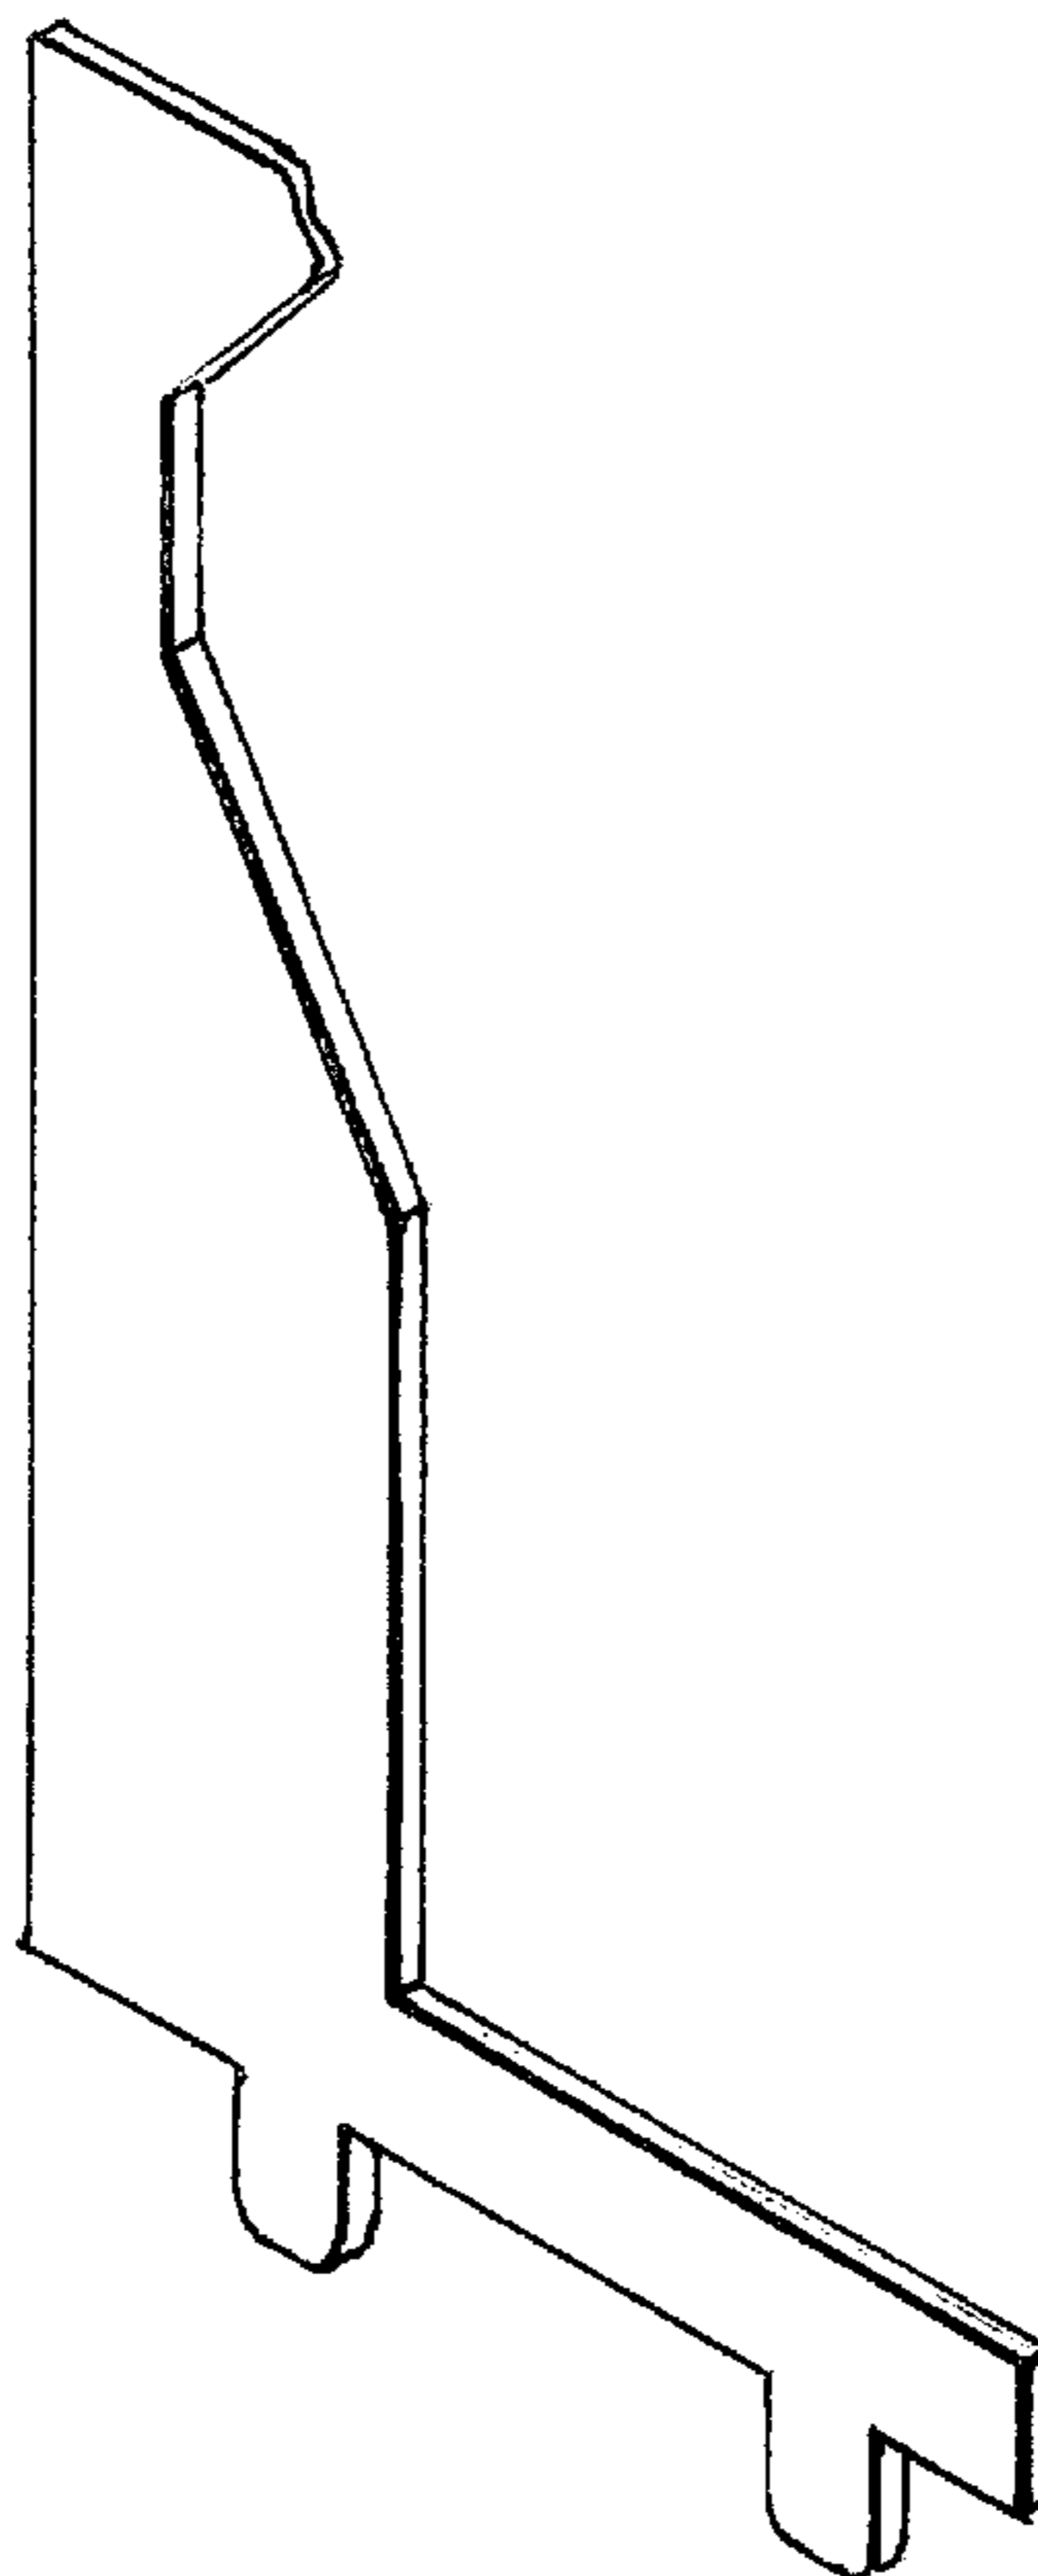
is a top, front and right side perspective view of an electrical connector, showing our new design;
